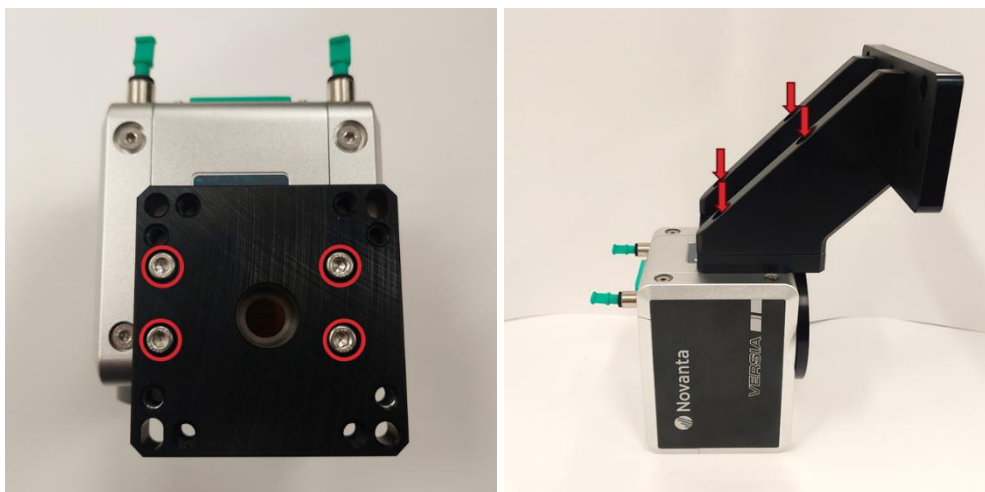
Left: Scan head with mounting plate fixed to its back, with four M5 screws (highlighted); Right: Complete Scan head – Mounting-bracket assembly
